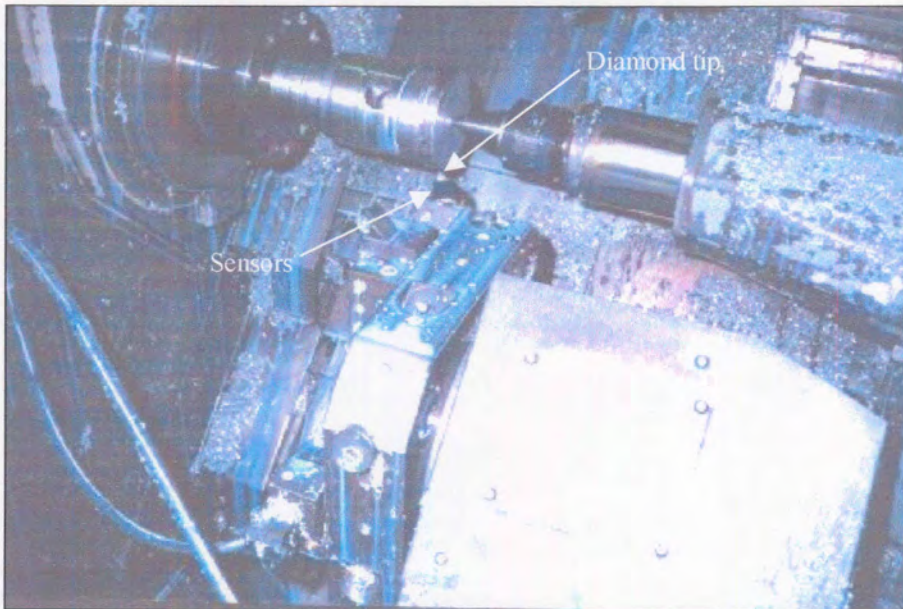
Part before machining, with diamond tip and mounting of sensors and wires visible
